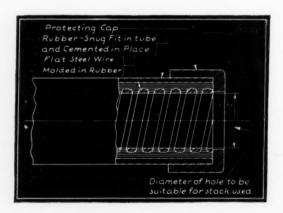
Method employed for deadening noise of stock in steady rests of automatic screw machines
